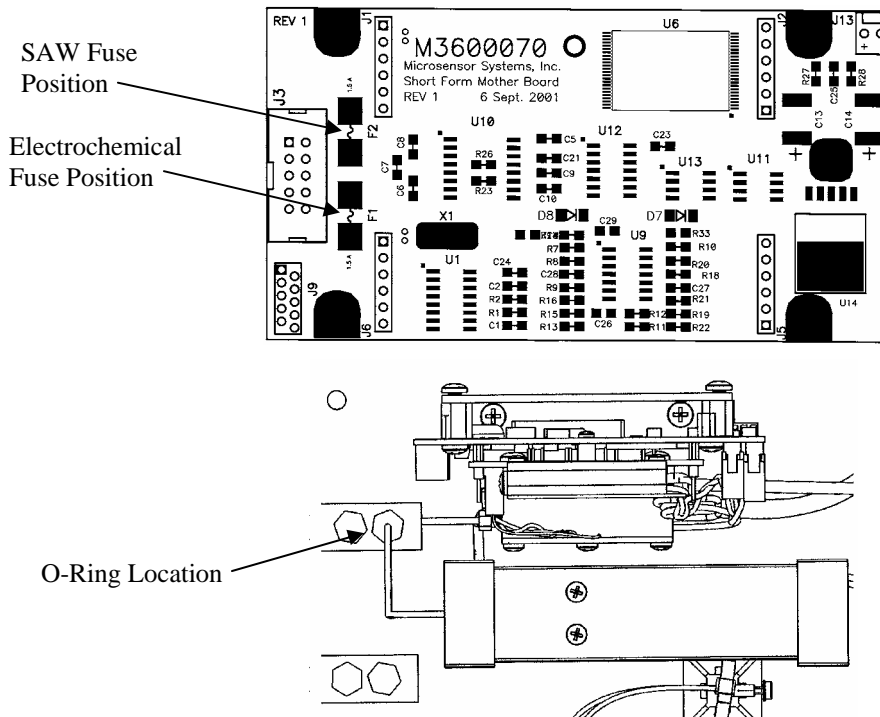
Fuse Chips on Routing Board and O-Ring Location
